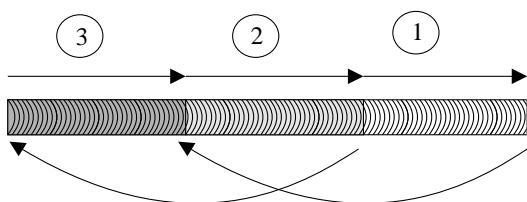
c Welding sequence for cracks with length less than 300 mm
